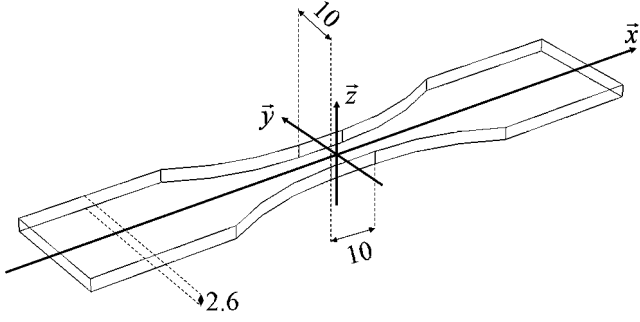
Shape and main dimensions of the specimen; frame of reference (dimensions are in millimetres)
